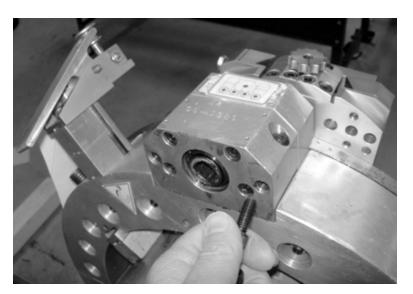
Remove the pinion housing motor mounting screws and store them in a secure place.
